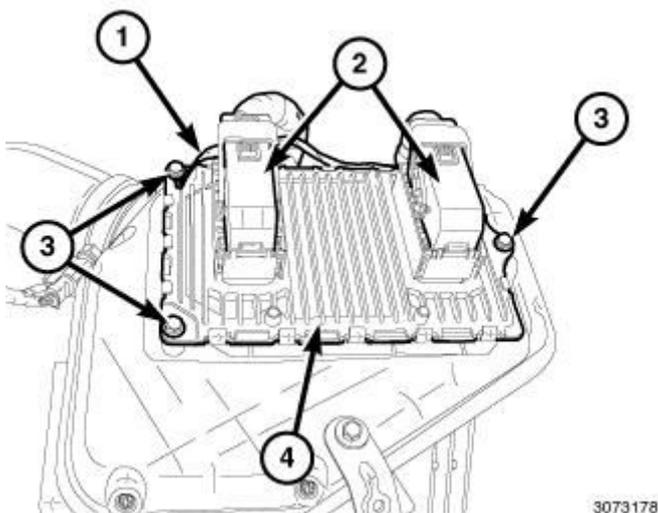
Electrical Connectors, PCM, Three Mounting Bolts & Ground Wire
